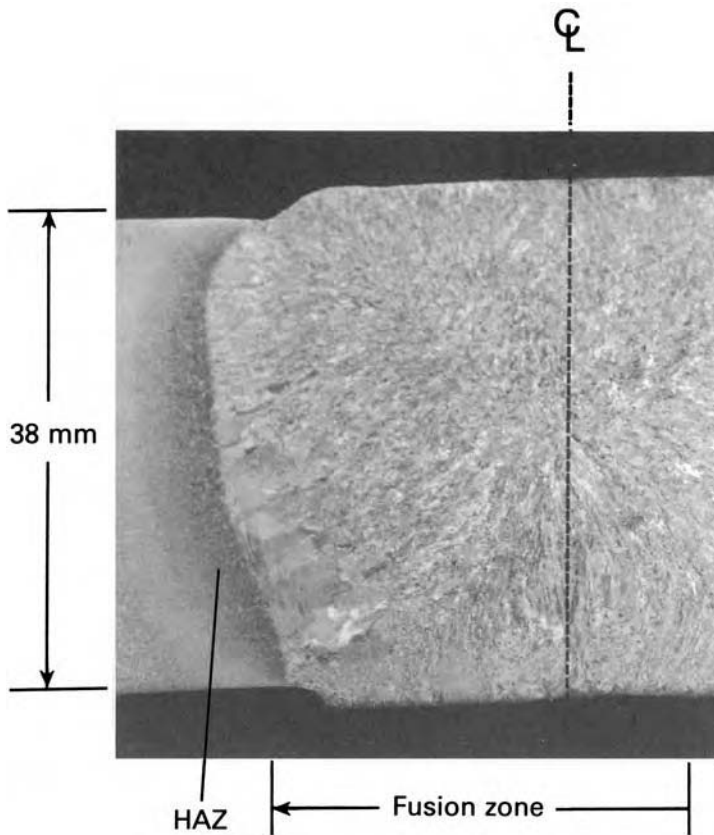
Macrograph showing fusion zone and heat-affected zone (HAZ) in an electroslag weldment
